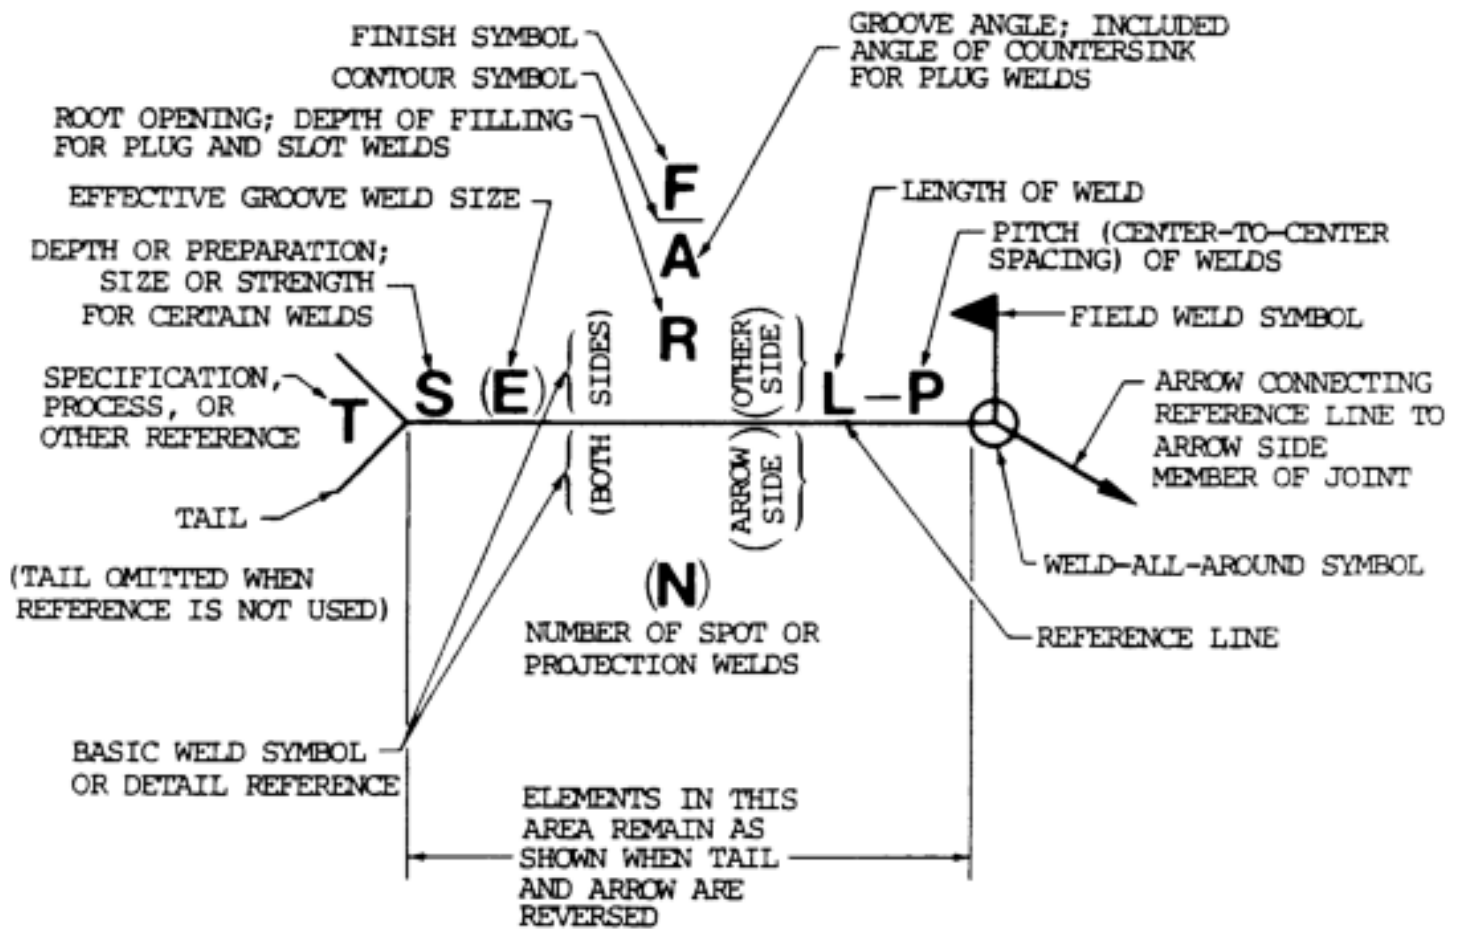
Standard locations of elements of a welding symbol.
